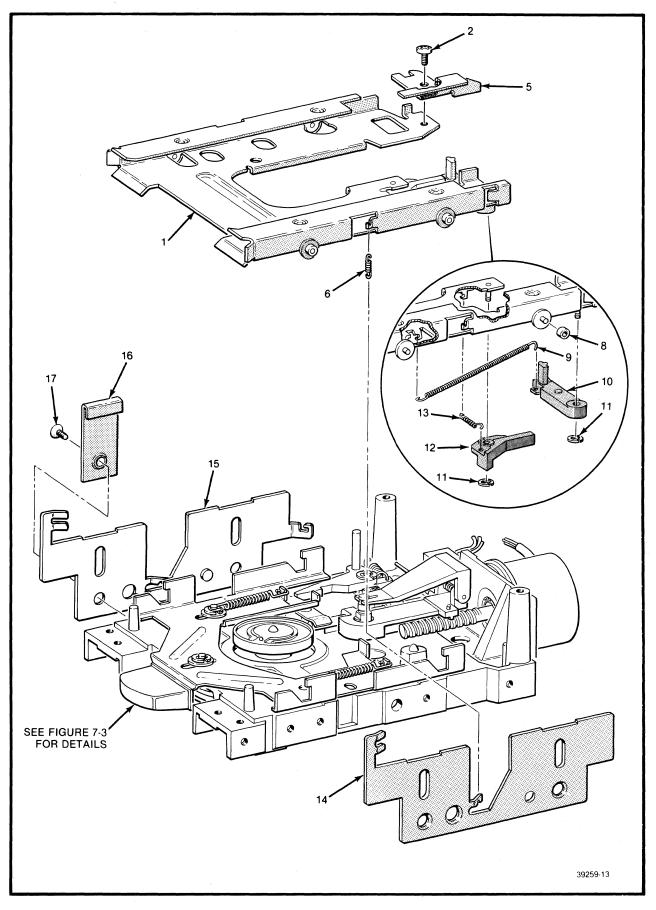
PLATFORM EJECTOR/ELEVATOR ASSEMBLY
